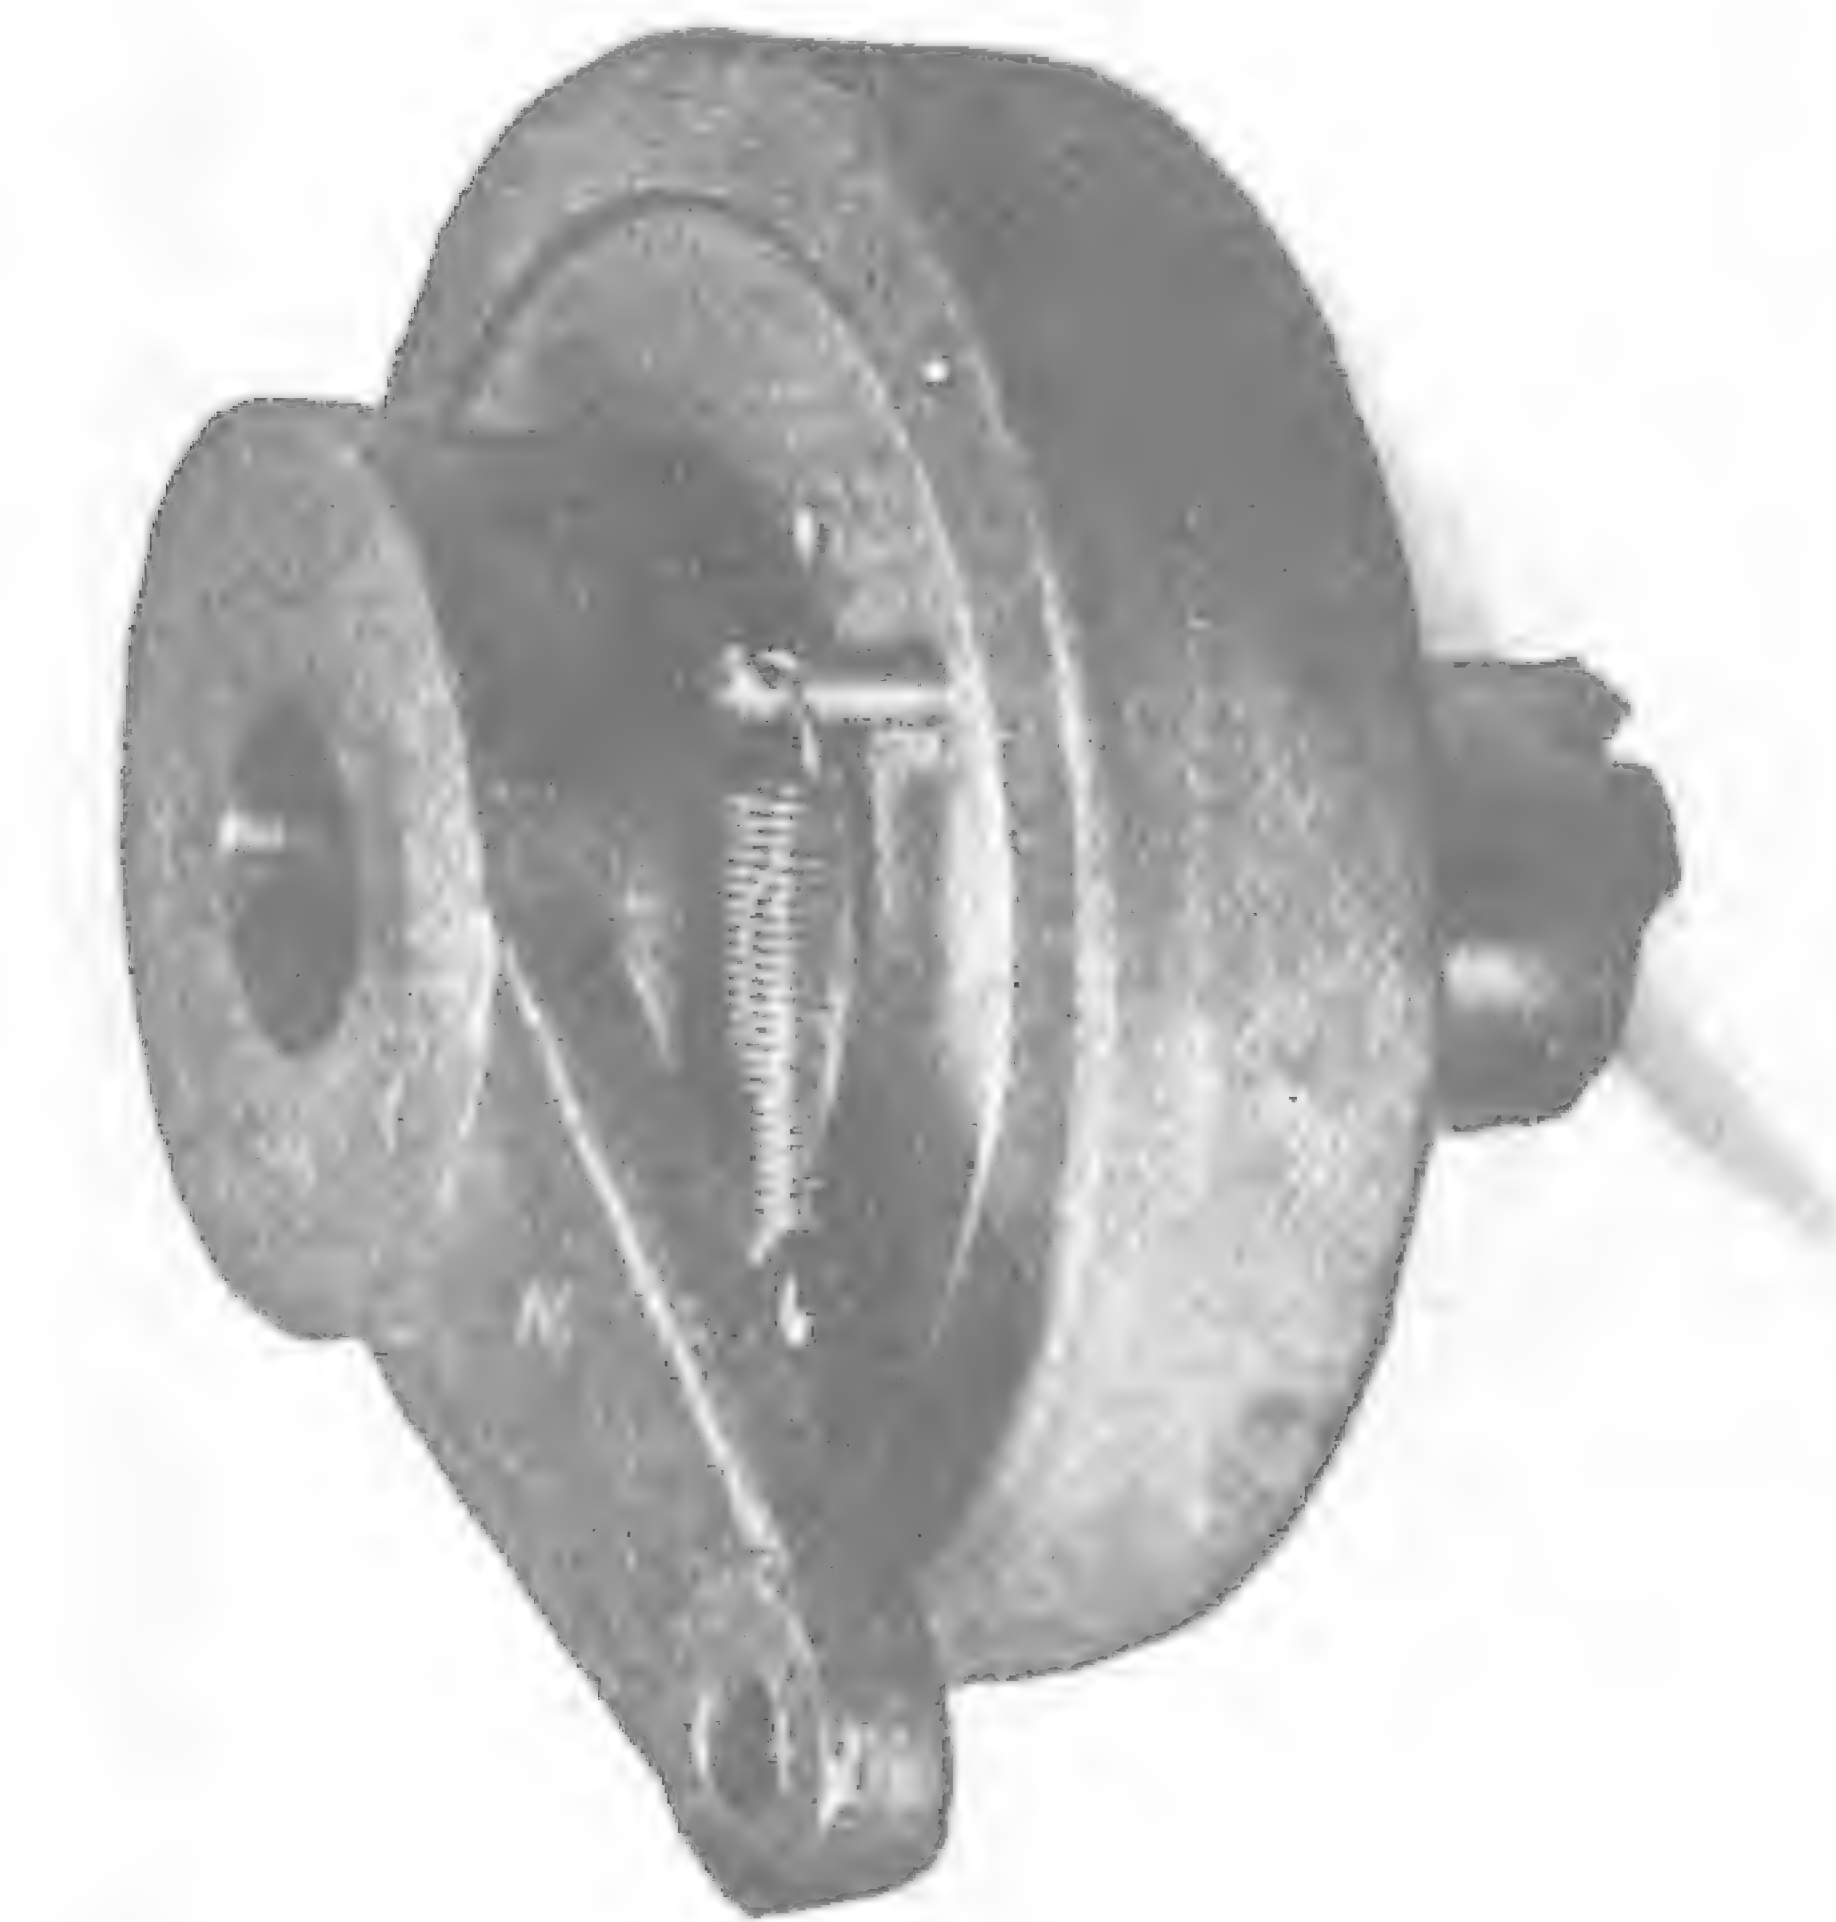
Intermittent Motion Machinery Clutch. Frame, Cam Gears and Central Gear are of S.A.E. 3250 Nickel-Chromium Steel
